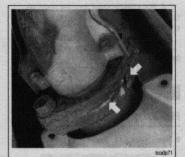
Inspect flanges for gaskets that have deteriorated and need replacement
